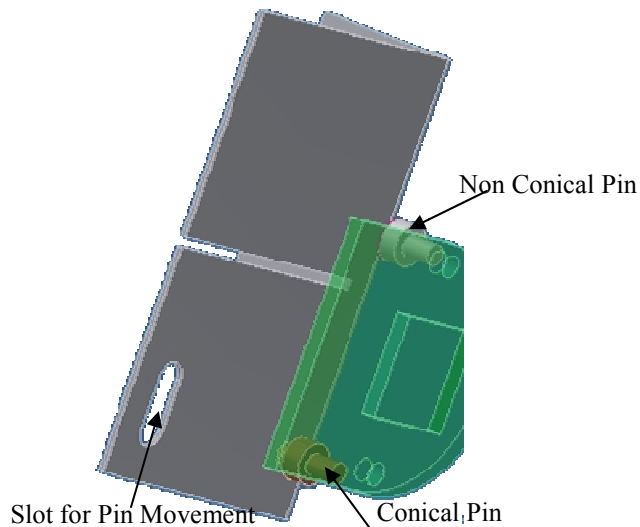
CAD Diagram of Leaf Spring Showing Slot for Movement and PCB
